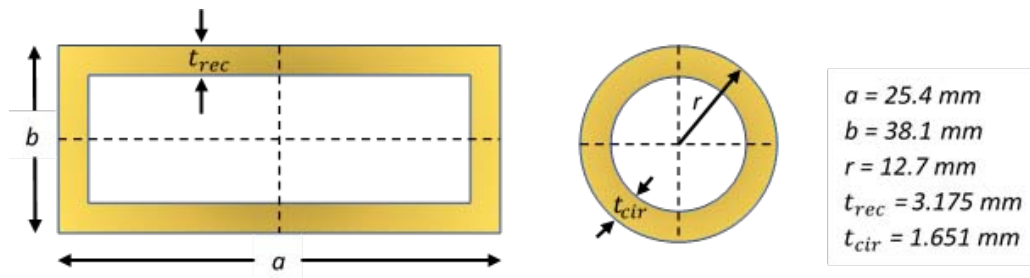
Modified aluminum chassis design section profiles (a) rectangular and (b) circular.
